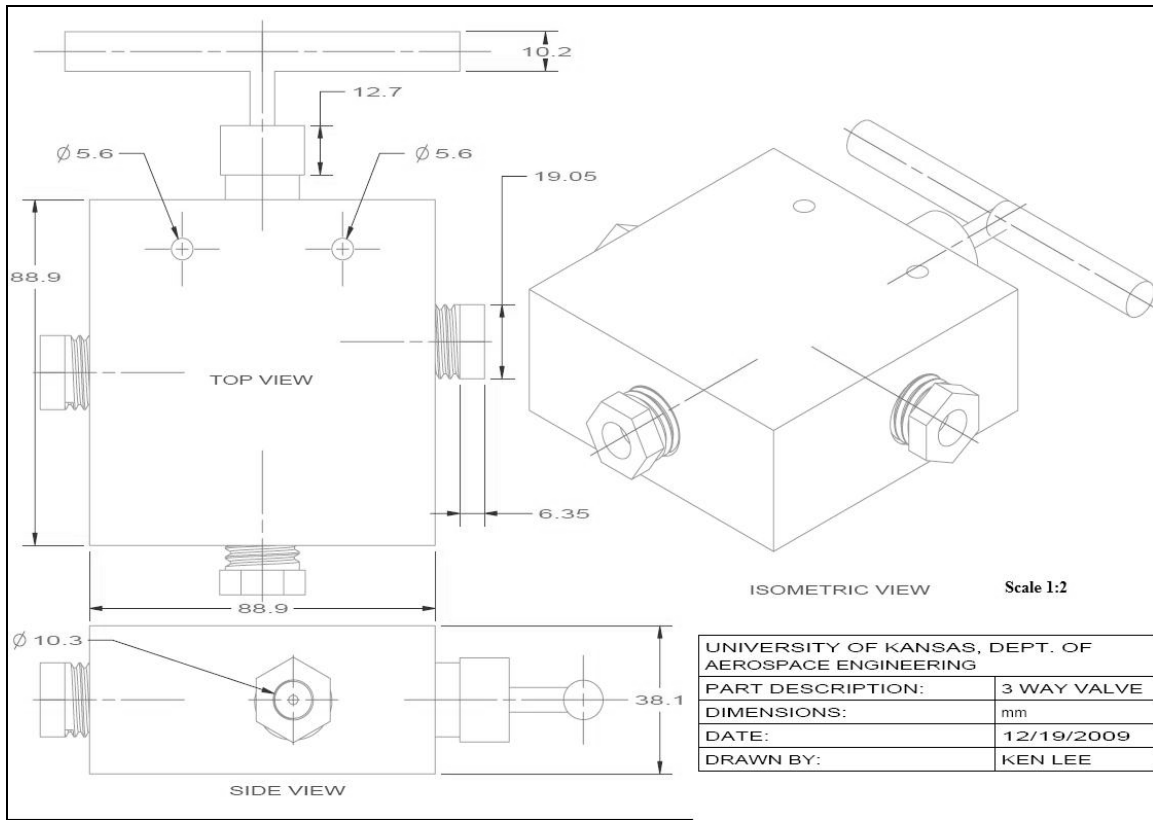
Side, Top and Isometric CAD Views of the 3-Way Valve Drafted in UG NX 6.0.
